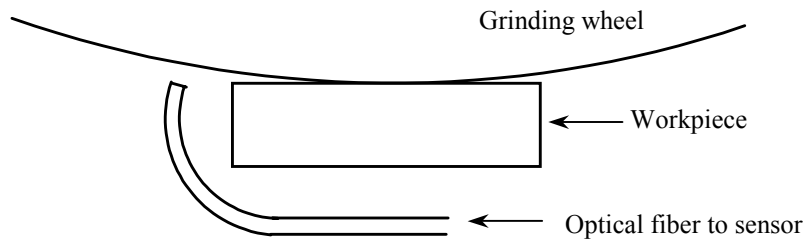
“Wheel surface after leaving grinding zone” test arrangement
